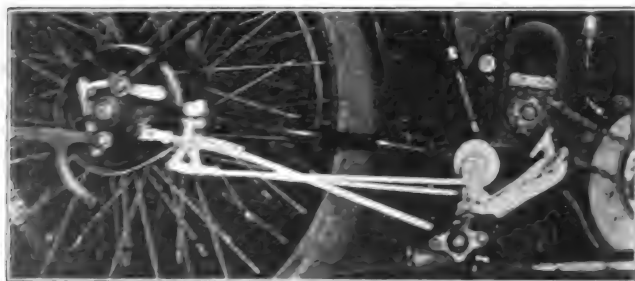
Side view of foot lever and rods. The combination lever is raised and retains its position through the action of the high gear rod spring. Fig. 2 shows a rear view of the parts when foot levers are in this position.
